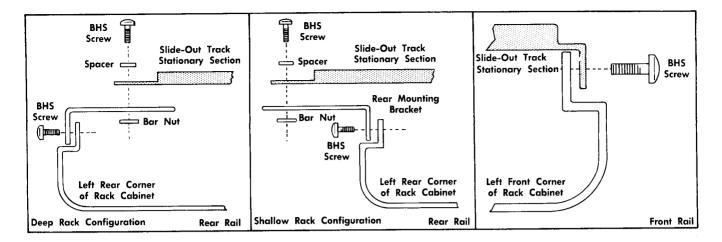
Rack rails tapped for 10-32 machine screws.
